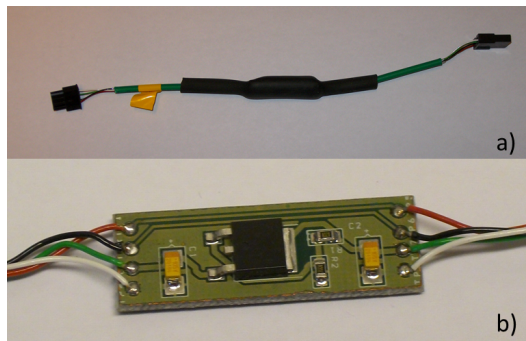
Photograph of a regulator ready to install with the connectors a), and the circuit board with the electronic components mounted b)
